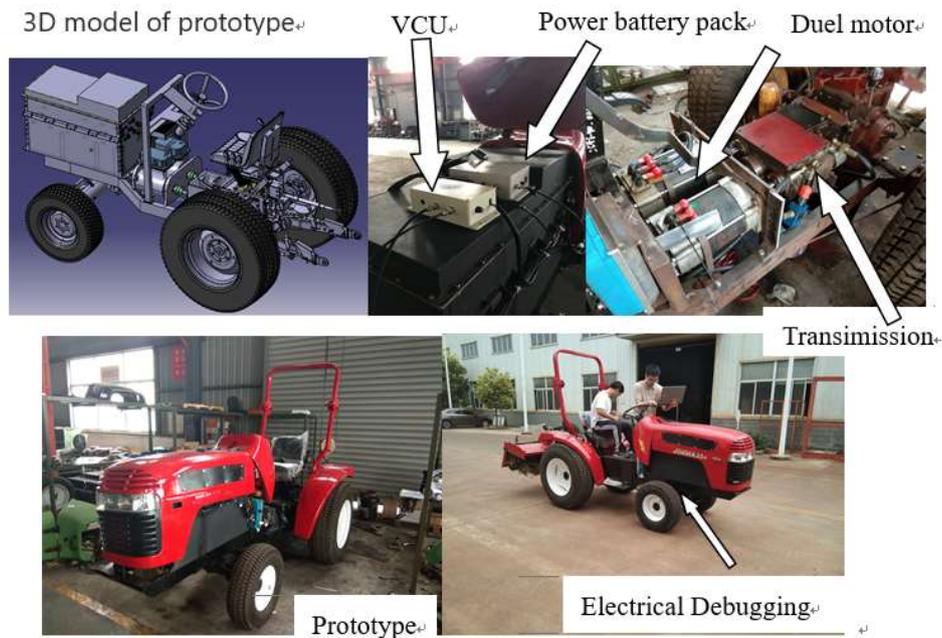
Electric tractor prototype with a dual-motor drive.
